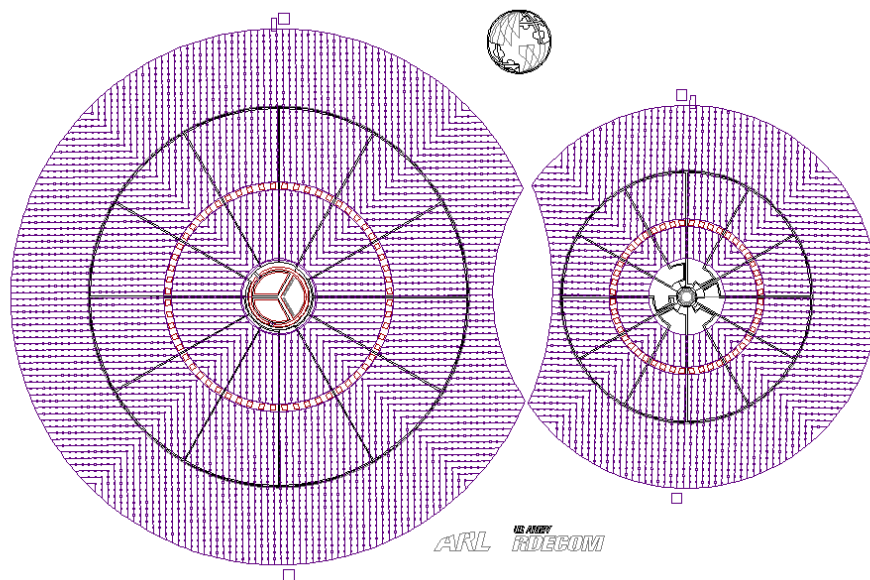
Rotor design using a multi-layer electroplating process to create interlocking rotors.
